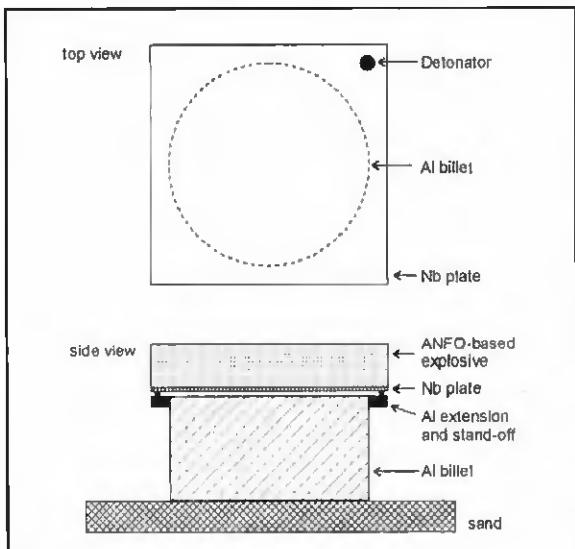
Schematic drawing of the explosive welding setup. The cylindrical aluminum billet is clad using an oversized square Nb plate to promote good bonding near the edge of the aluminum billet.
